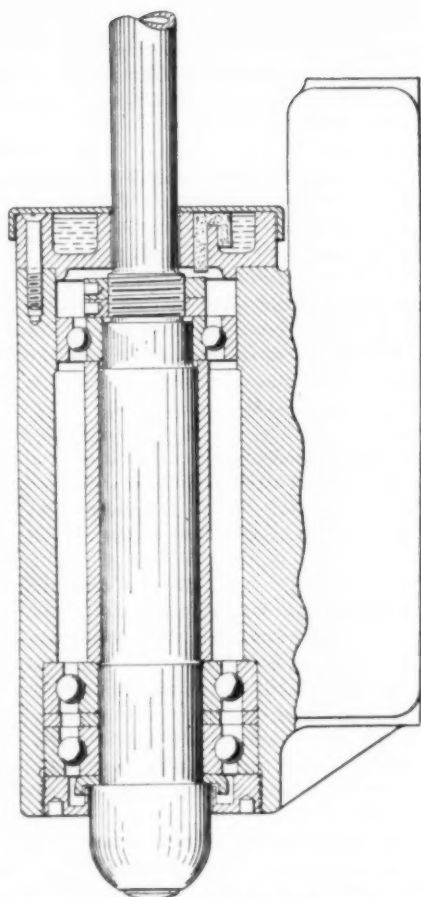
SPINDLE OF SMALL HIGH-SPEED VERTICAL MILLING MACHINE
